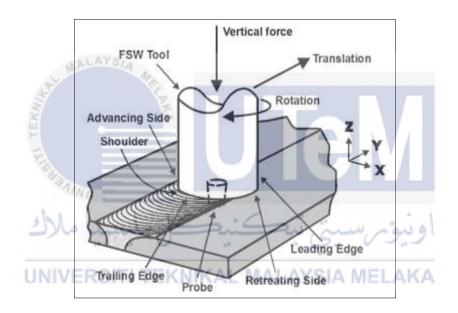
The Dry Friction Stir Welding (FSW) Process is illustrated schematically
